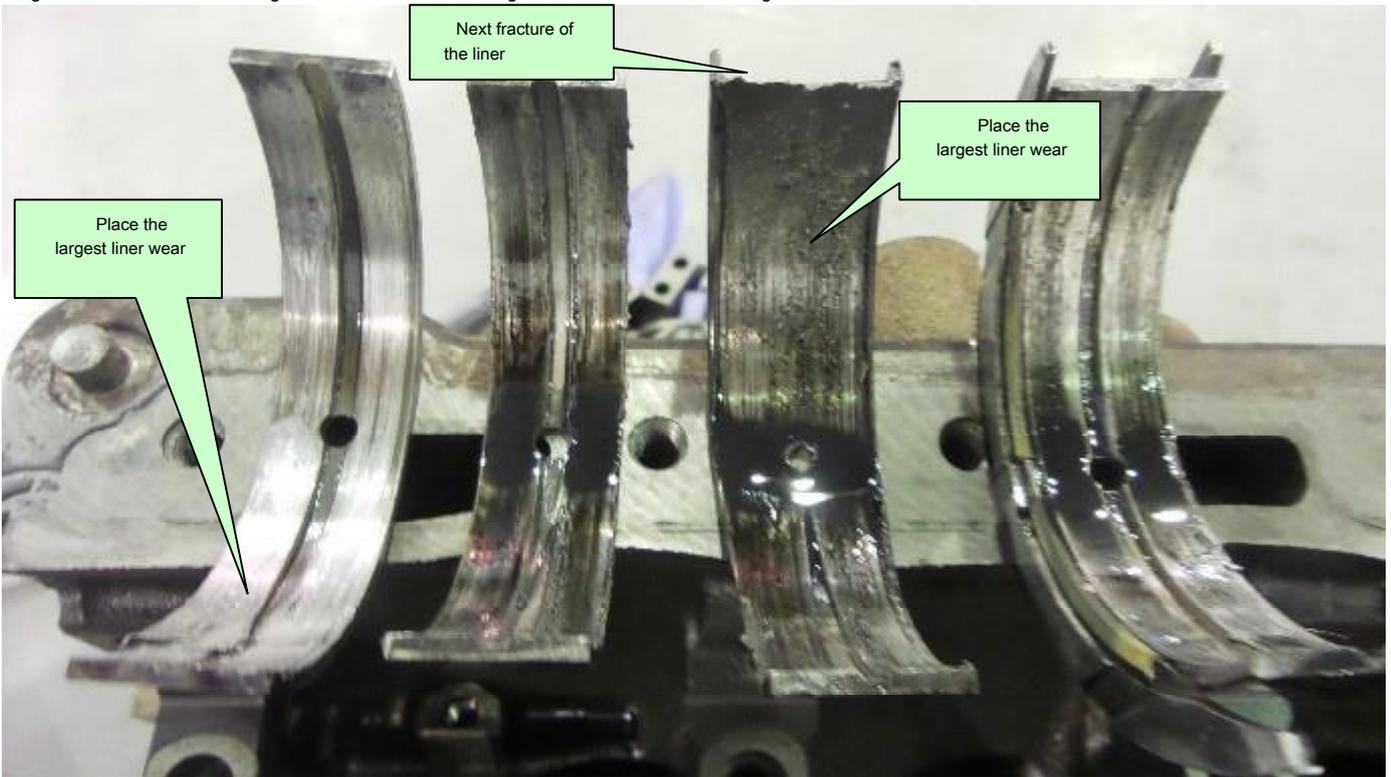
Condition root bushings after removal of the test vehicle the crankshaft of the engine LAND
